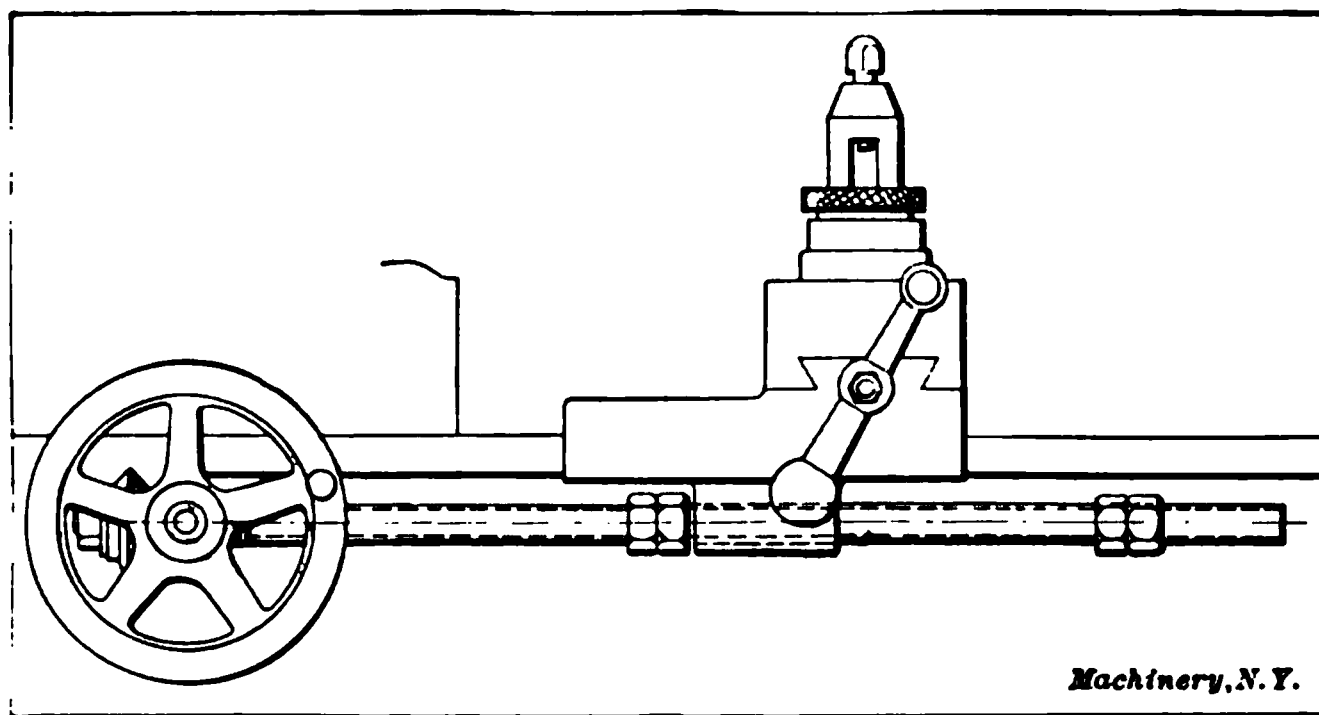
Stop-rod passing through a Hole in a Turret Lathe Cross-slide
